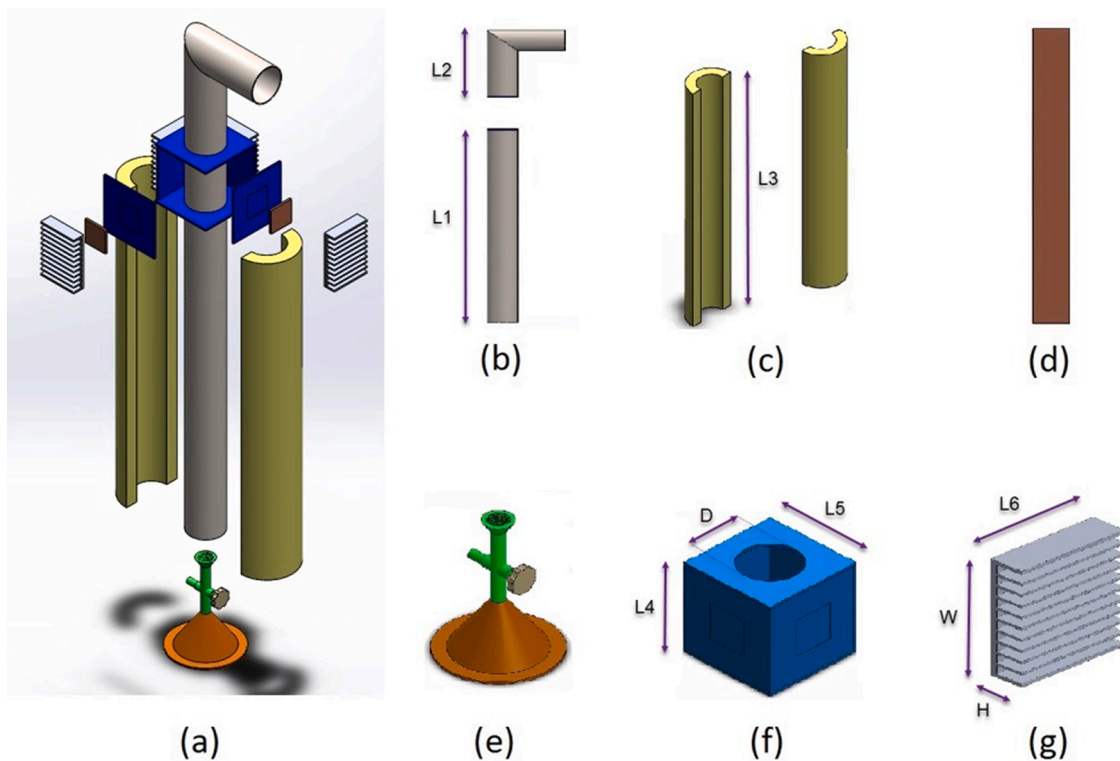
(a) The exploded view of the experimental setup (b) pipe (c) insulation (d) thermoelectric (e) burner (f) box (g) heatsink.
